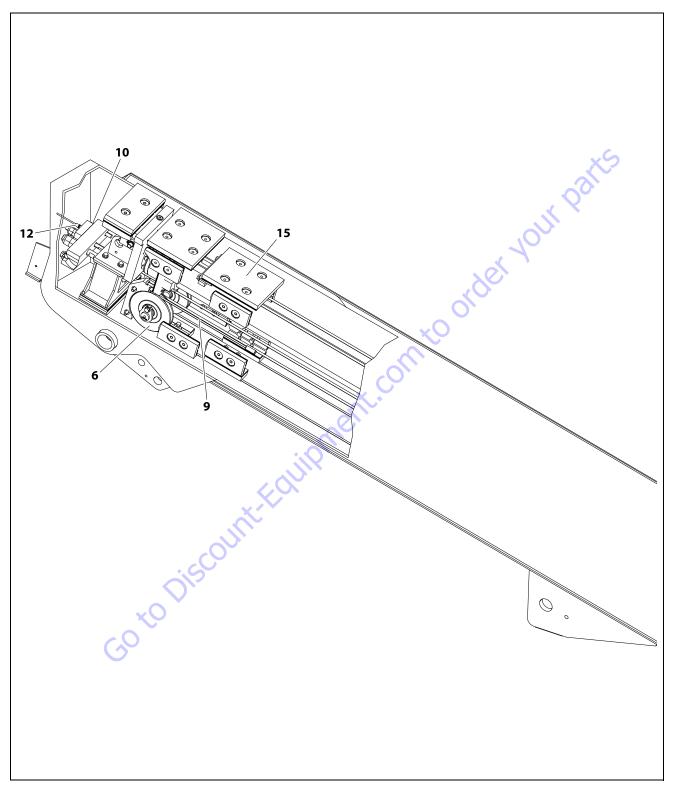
Boom Assembly Cutaway - Sheet 1 of 2
